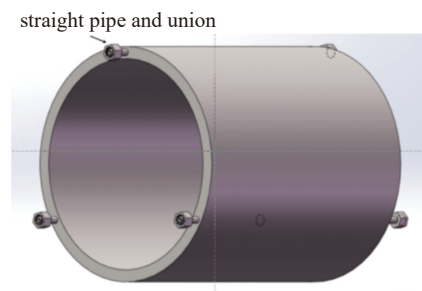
Three-dimensional shape of stainless tube with flexible junctor
